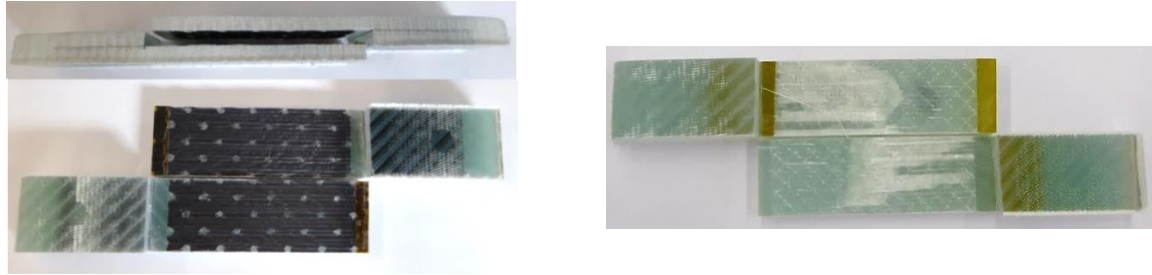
Fracture surface of shear test specimens. Left: with heating foil, Right: reference without
